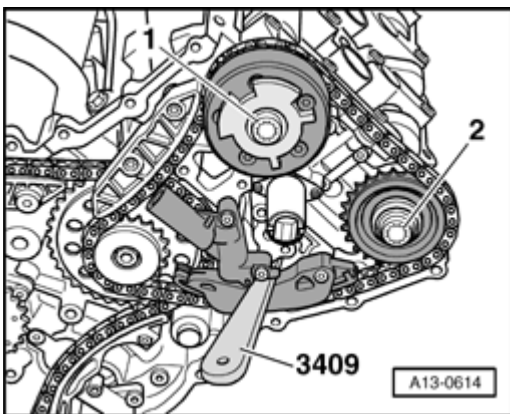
Tightening Camshaft Bolt On Exhaust Camshaft Of Right Cylinder Head To Initial Tightening Torque
